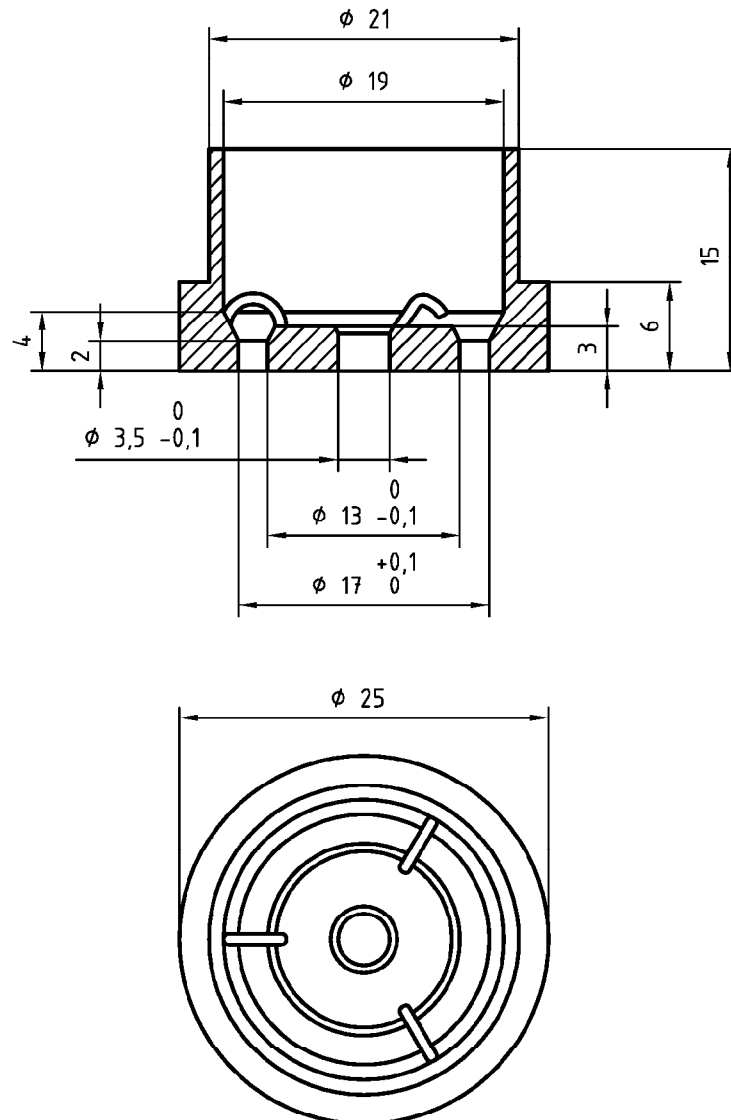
Outlet nozzle for falling sand test apparatus (manufactured from brass with perforated plates held centrally by three connecting pieces)
